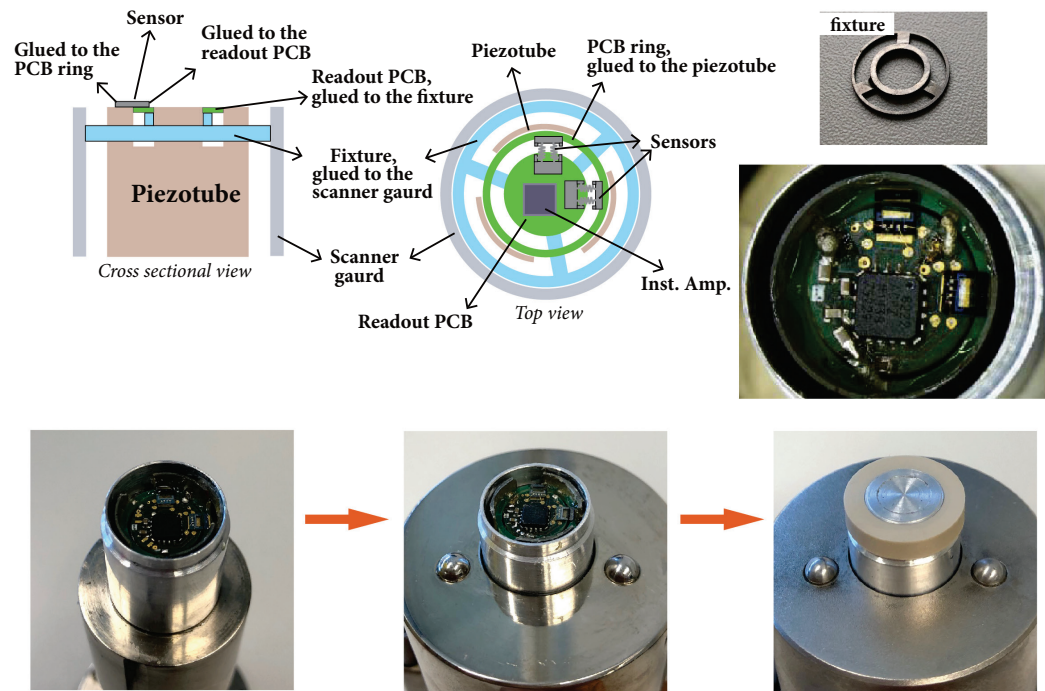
Implementation of the closed loop scanner with the displacement sensors inside the scanner. (a) The top part of the piezotube is cut into a crown shape so the fixture can be fitted. The sensors are glued onto the readout PCB and the PCB ring. The readout PCB is glued onto the fixture (stationary part) and the PCB ring is glued to the piezotube (moving part). The fixture is glued to the scanner guard so the scanner guard via the fixture supports the readout PCB. The instrumentation amplifier is placed next to the sensors. (b) The implementation steps toward a functional closed loop scanner where the displacement sensors are protected safely inside.
